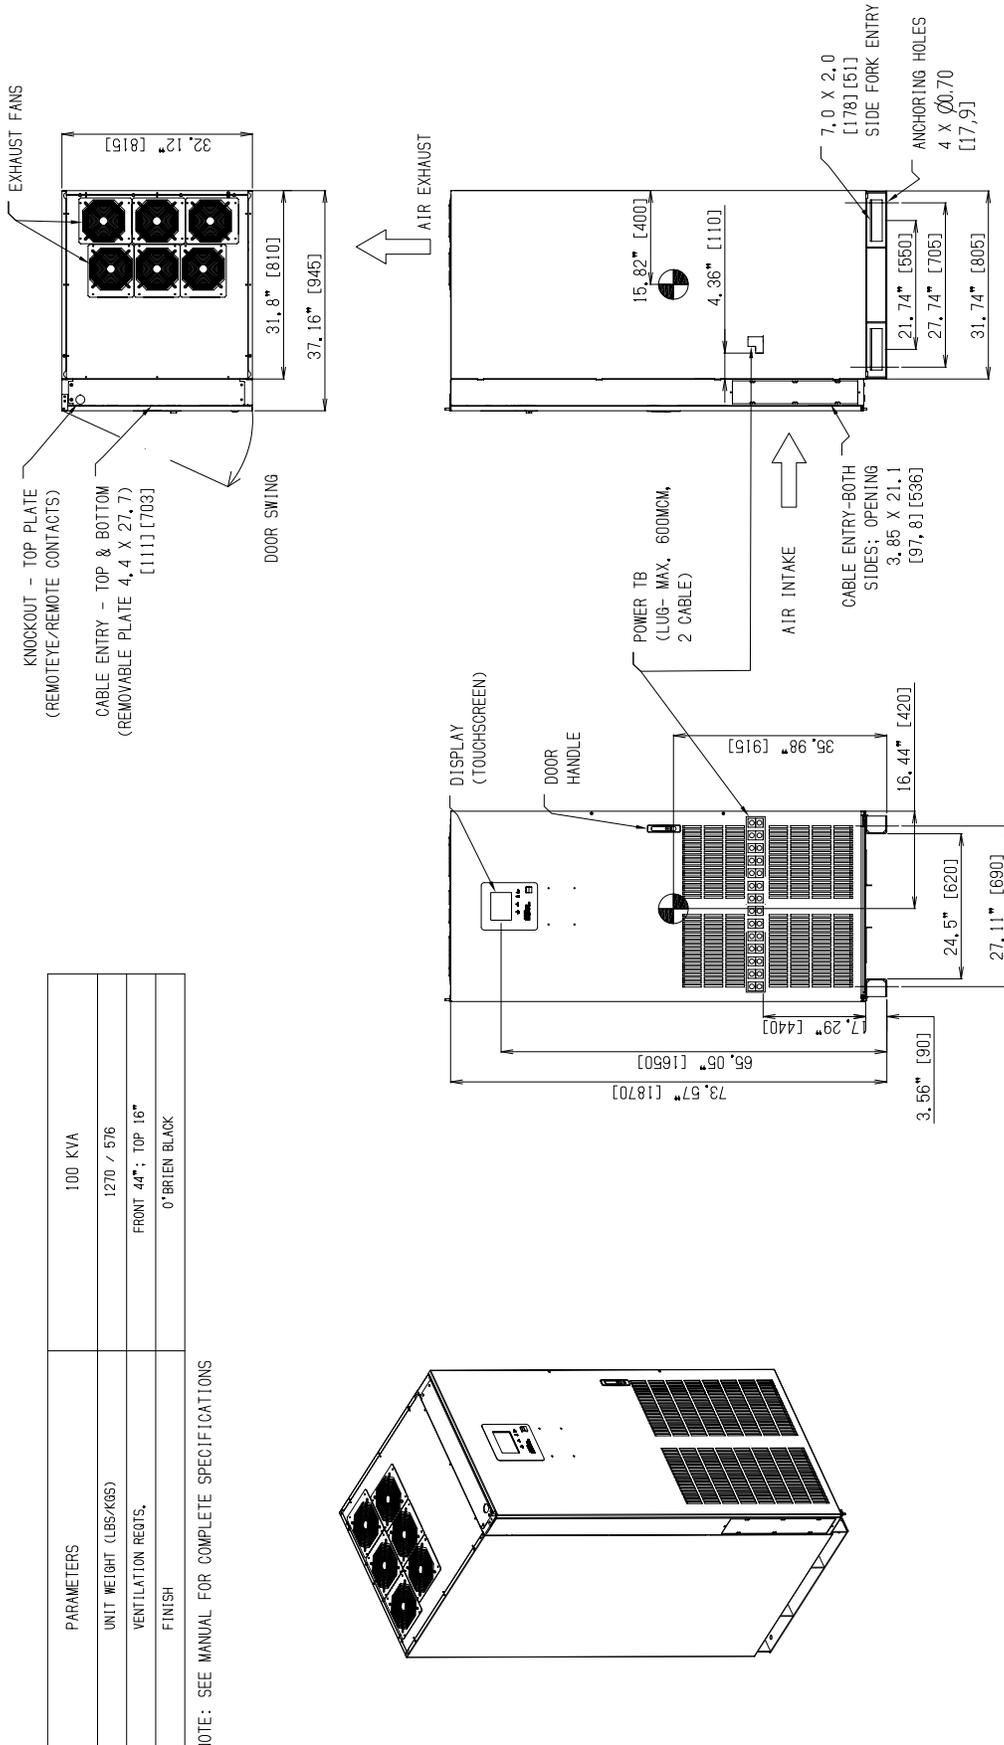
4400 100 KVA PHYSICAL DIMENSIONS
